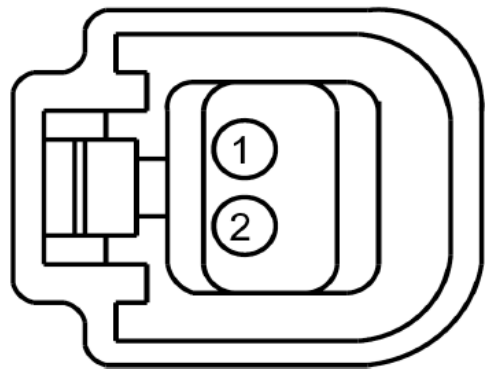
Coupler Assembly 1 Connector End View (C1534)
